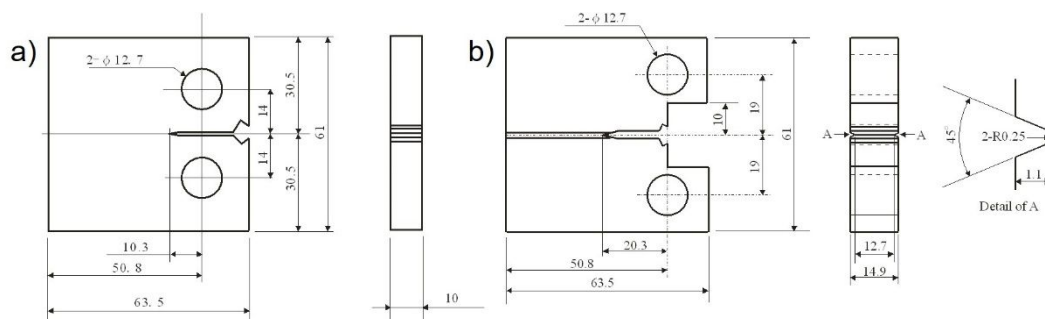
Shape and dimensions of the CT specimens (a) without side-groove and (b) with side-groove.
